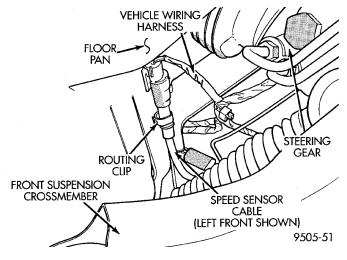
Speed Sensor Cable To Wiring Harness Connection
